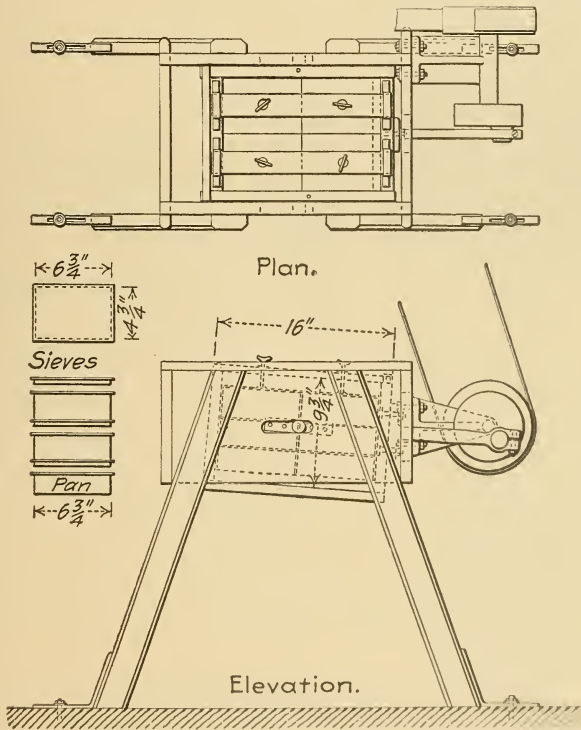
Mechanical Sifting Machine Used in the Philadelphia Testing Laboratories.
